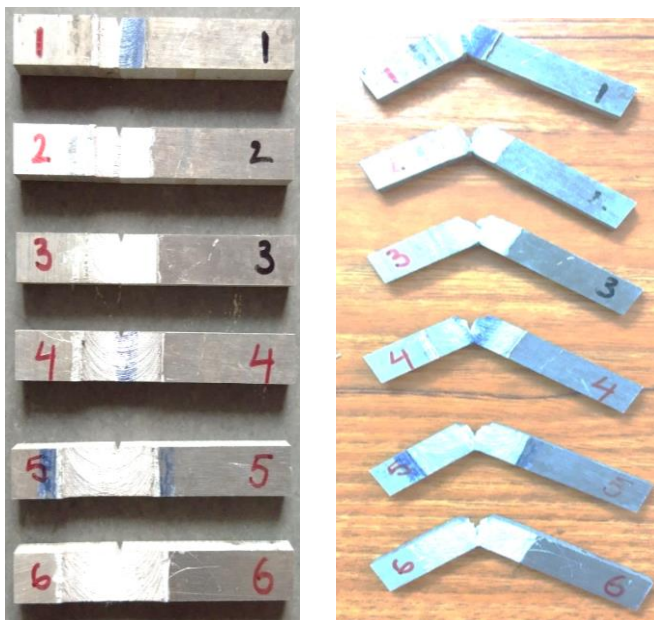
Impact specimen before test Fig. 9 Impact specimen after test
